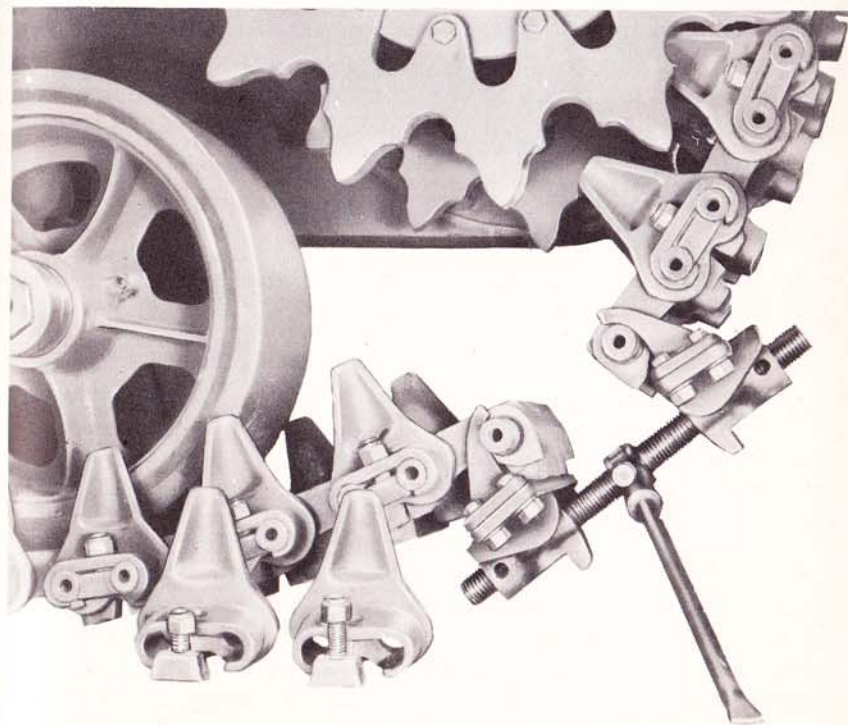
Joining Ends of Track, Using Track Assembling Fixture
